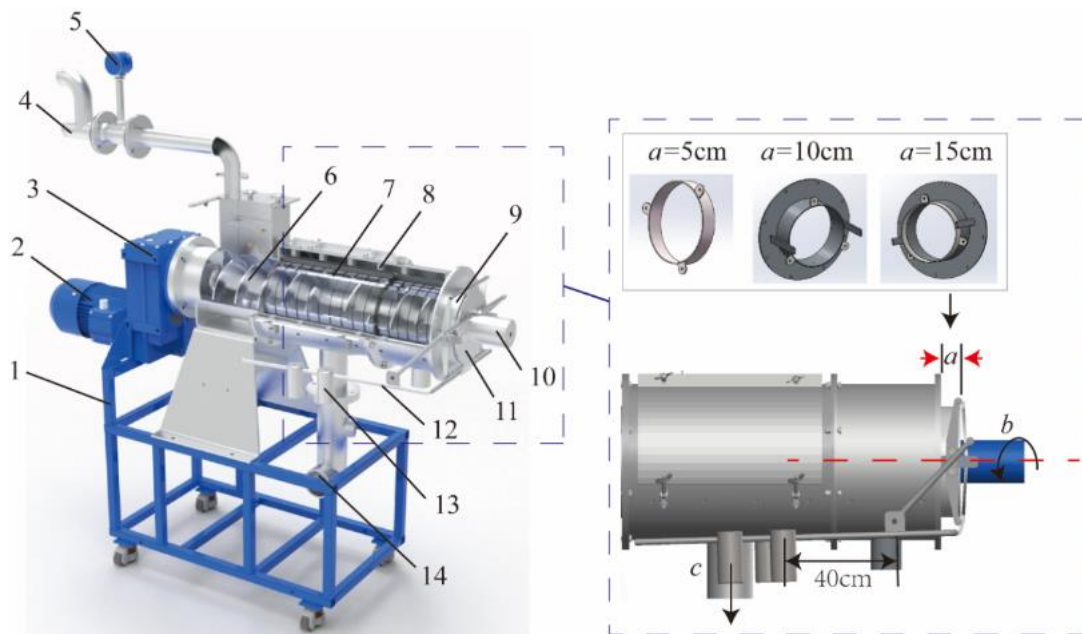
Structural sketch and parameter adjustment method of screw separator
